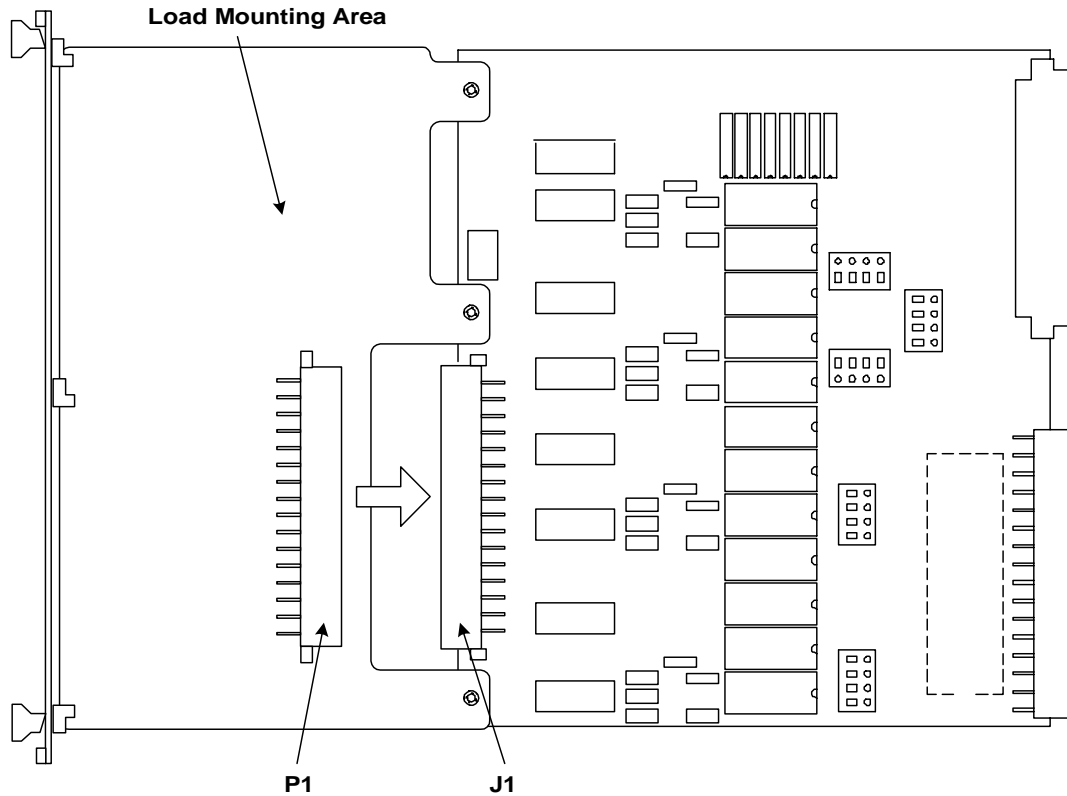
HP E6175A Load Mounting Area and P1/J1 Connectors
